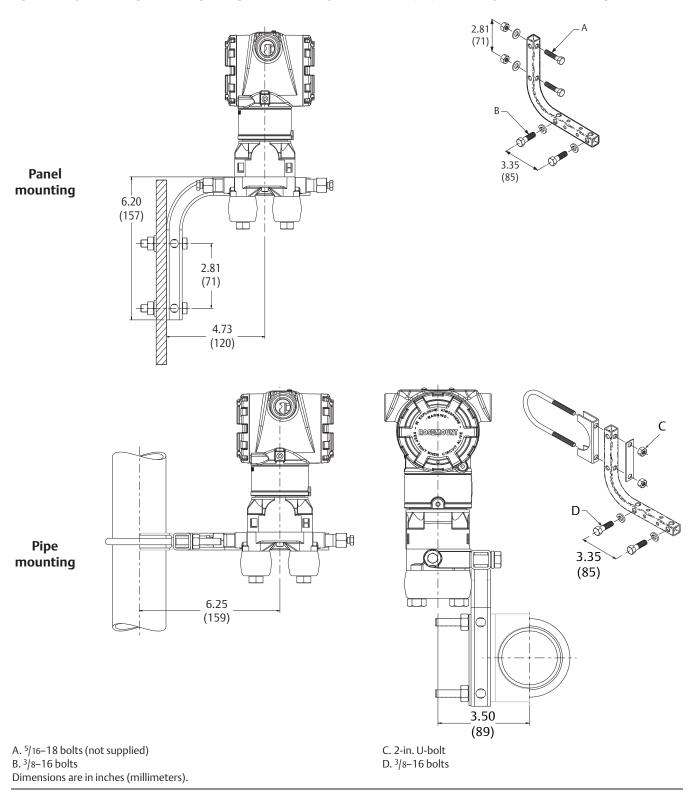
Coplanar Flange Mounting Configurations with Optional Bracket (B4) for 2-in. Pipe or Panel Mounting
